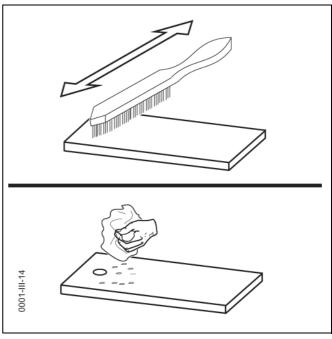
Cleaning the connecting surfaces of the conductor bars
